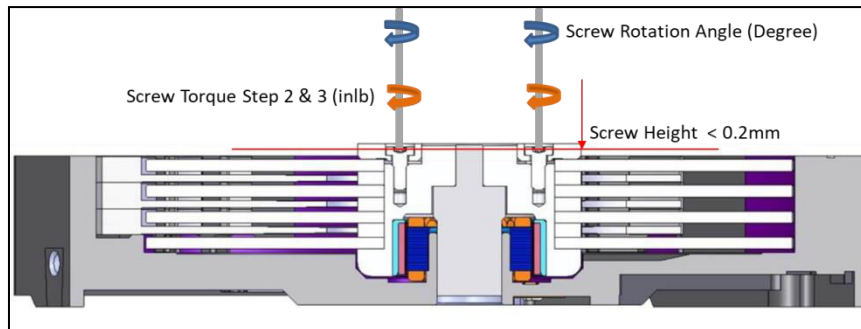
Cross section of hard disk drive assembly and screw driving process.
